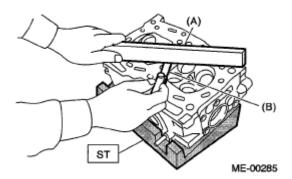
Measuring Warping Of Cylinder Head Surface Using Straight Edge Courtesy of SUBARU OF AMERICA, INC.
